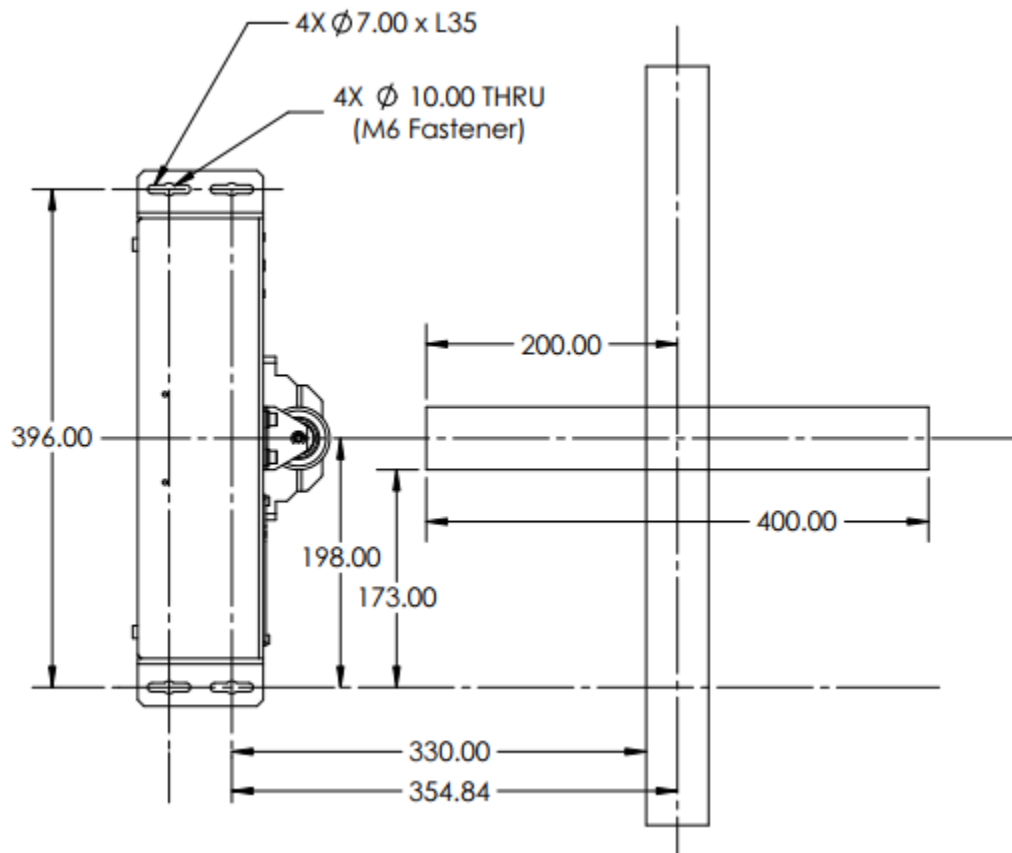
Charging Station Mounting Drilling Dimension (not to scale)
